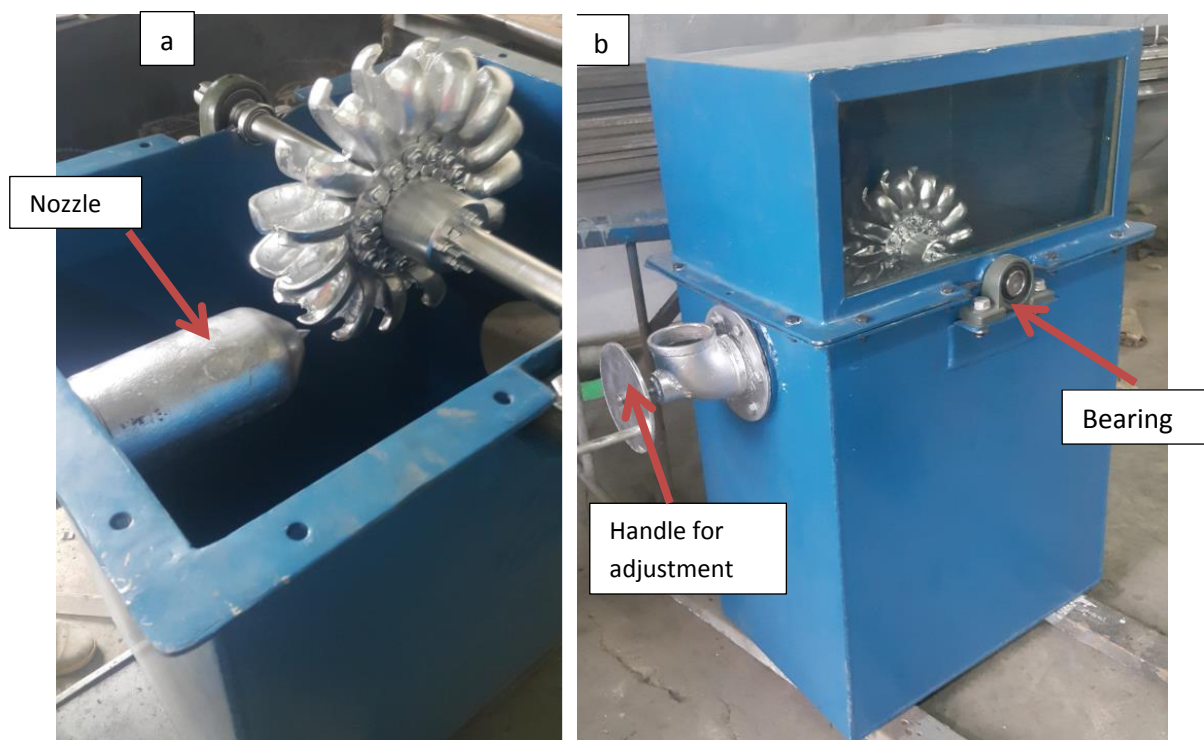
a. Fixing of nozzle assembly, runner with shaft and bearing on the lower casing, b. Final phase of assembly of the model Pelton turbine.
